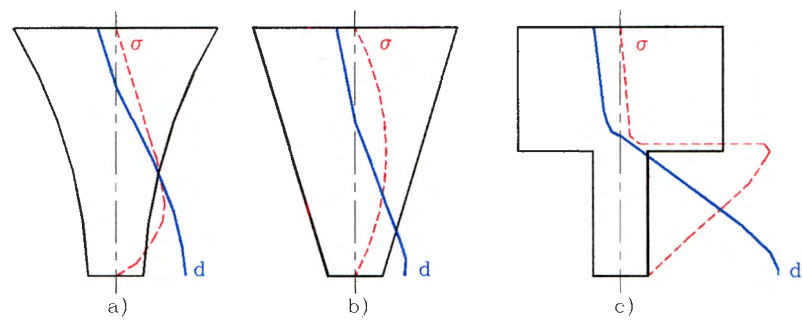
CONCENTRATOR DESIGNS : A) EXPONENTIAL B) CONICAL C) STEP CYLINDER ⁴³
